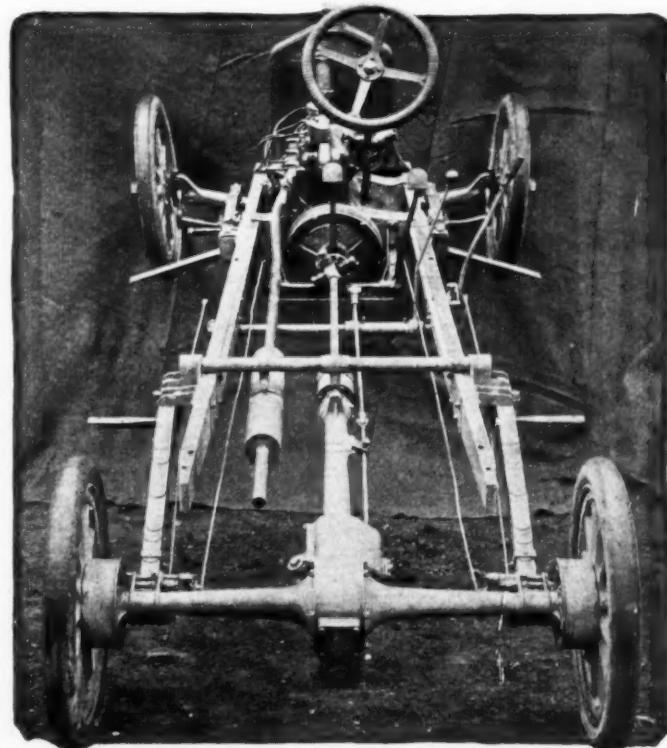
Rear view of Wolseley Stellite chassis, showing tubular frame cross members, cables for brake operation and rear spring mounting
